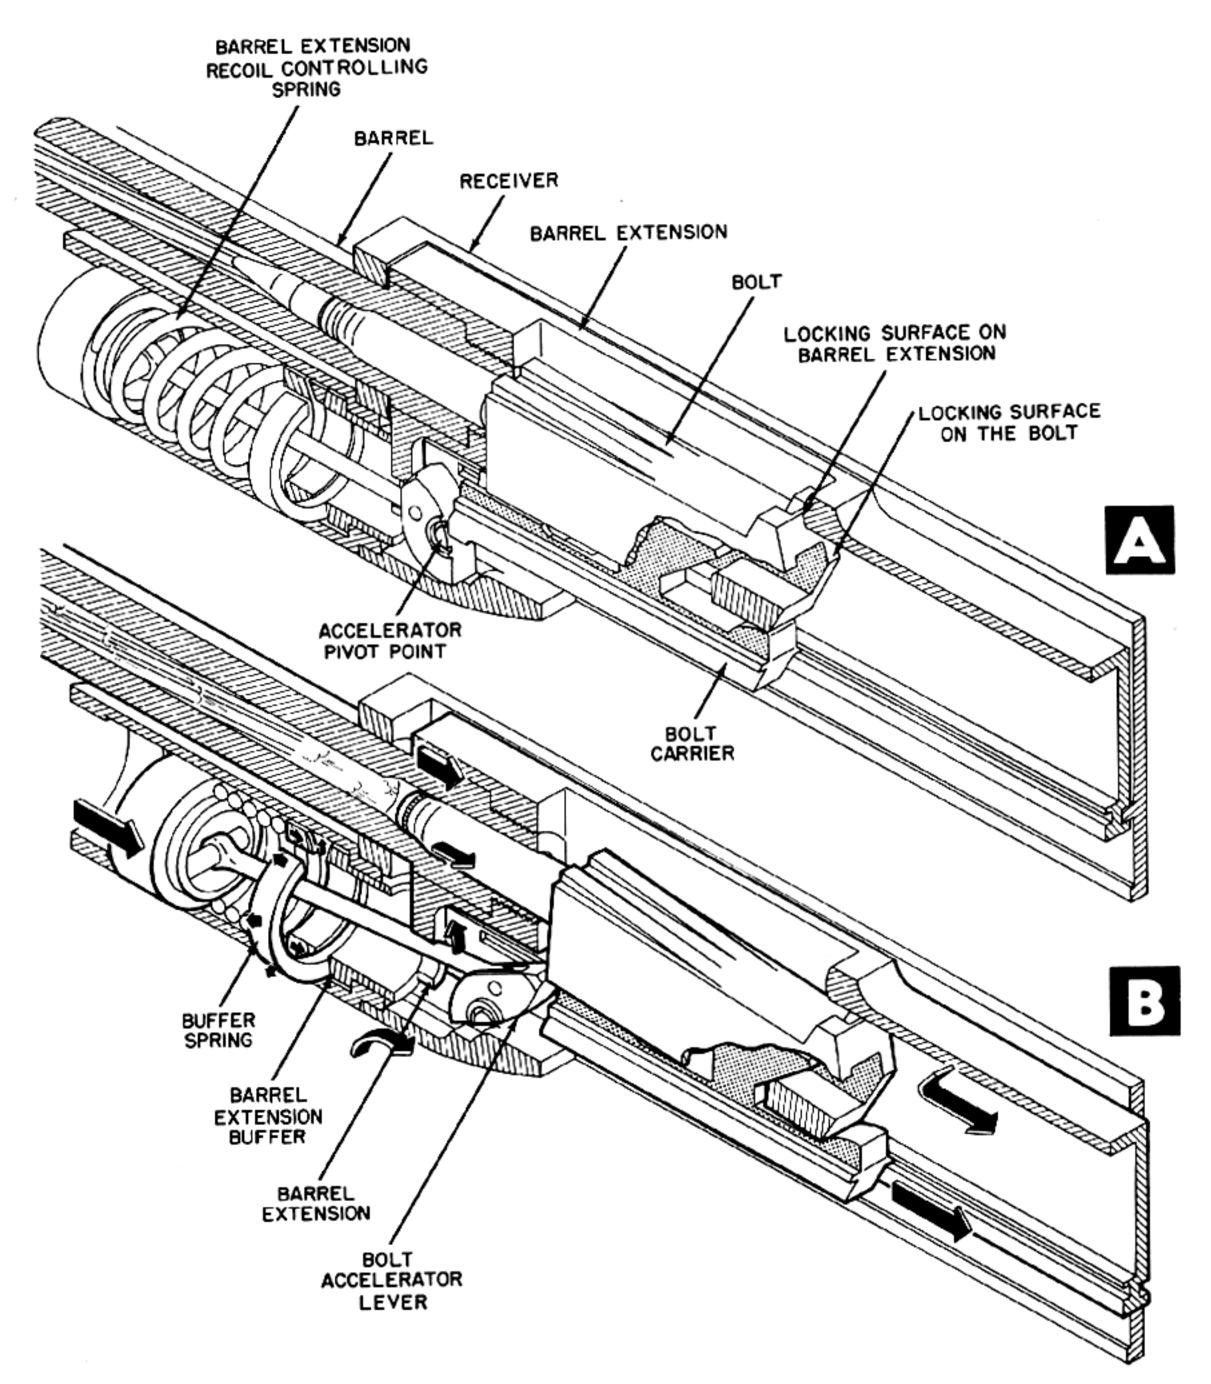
Recoil Operated Accelerator Forces Bolt to Rear and Also Acts as Barrel Extension Buffer.
